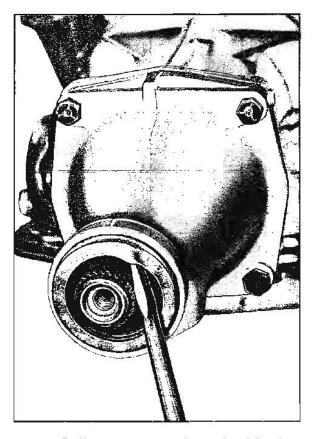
Removing Rear Bearing Retainer Oil Seal
